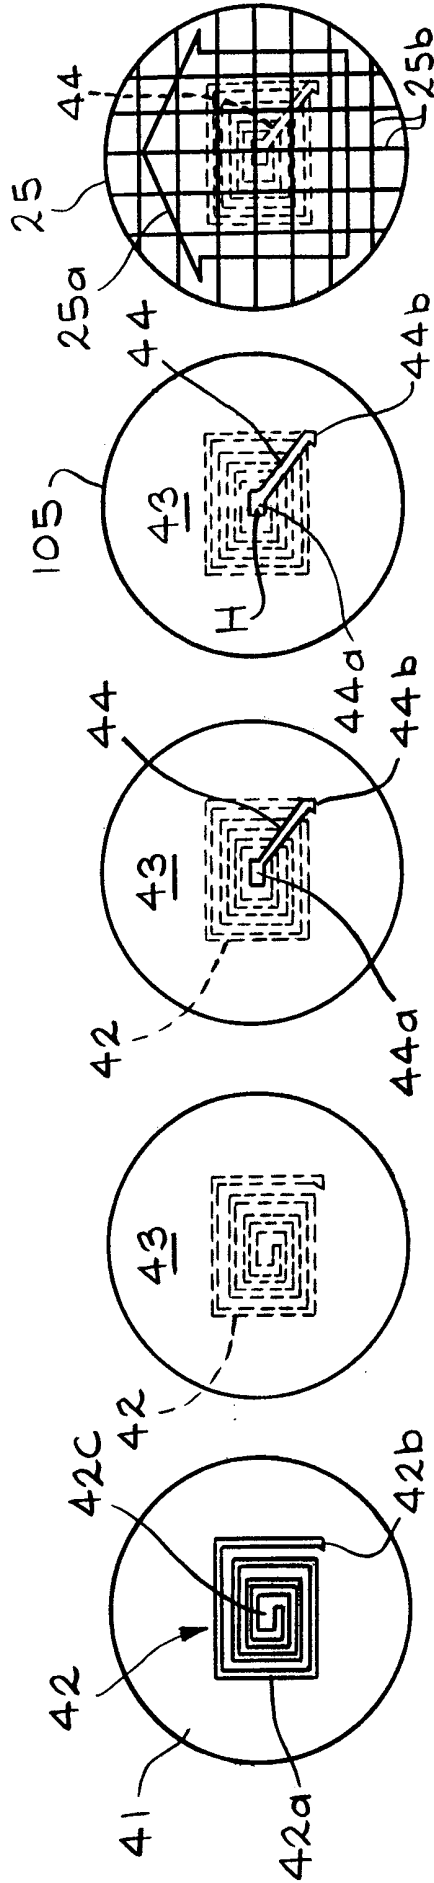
A FIG. 6B FIG. 6C FIG. 6D FIG. 7
